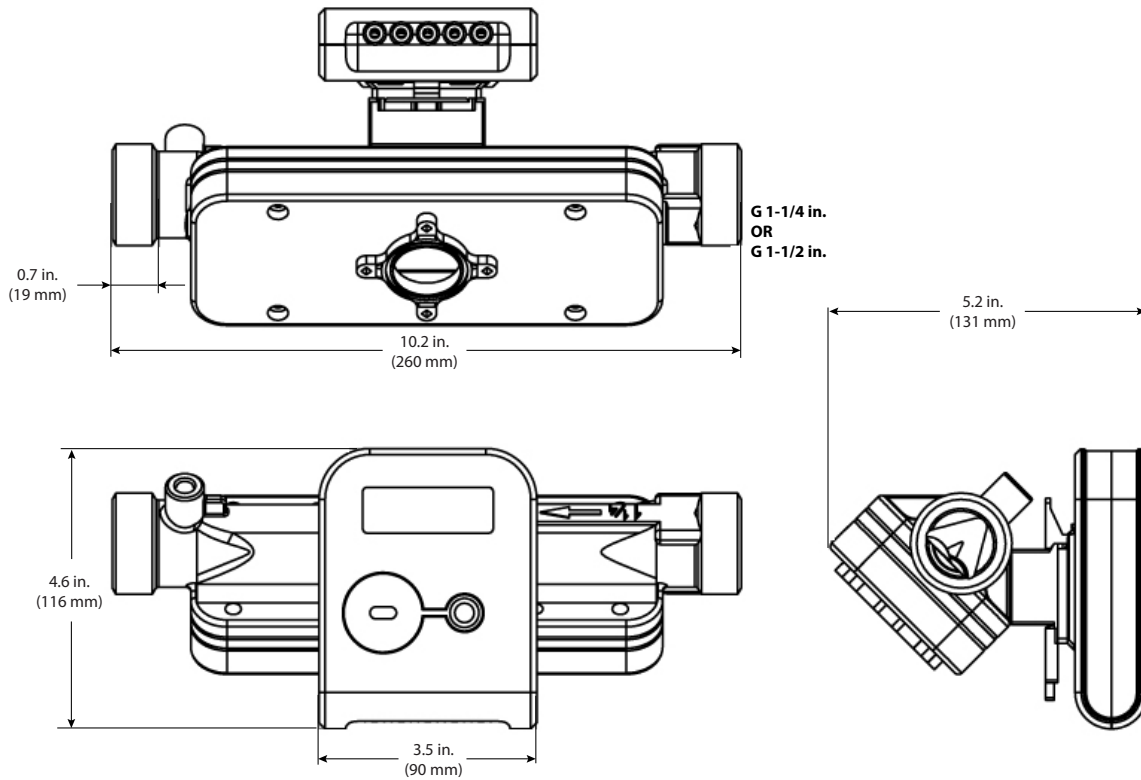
Flow sensor $q_p = 3.5/6.0 \text{ m}^3/\text{h}$; $L=260 \text{ mm}$; connection type: thread G1-1/4 in. or G1-1/2 in.
